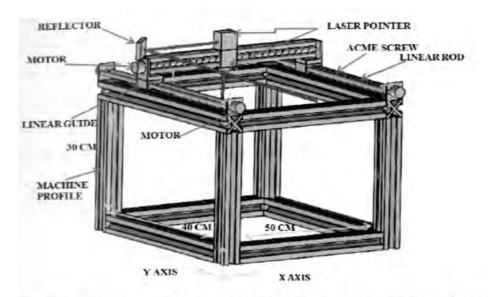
Isometric view of CNC machine frame (Source: Ambrizal et al., 2017)
